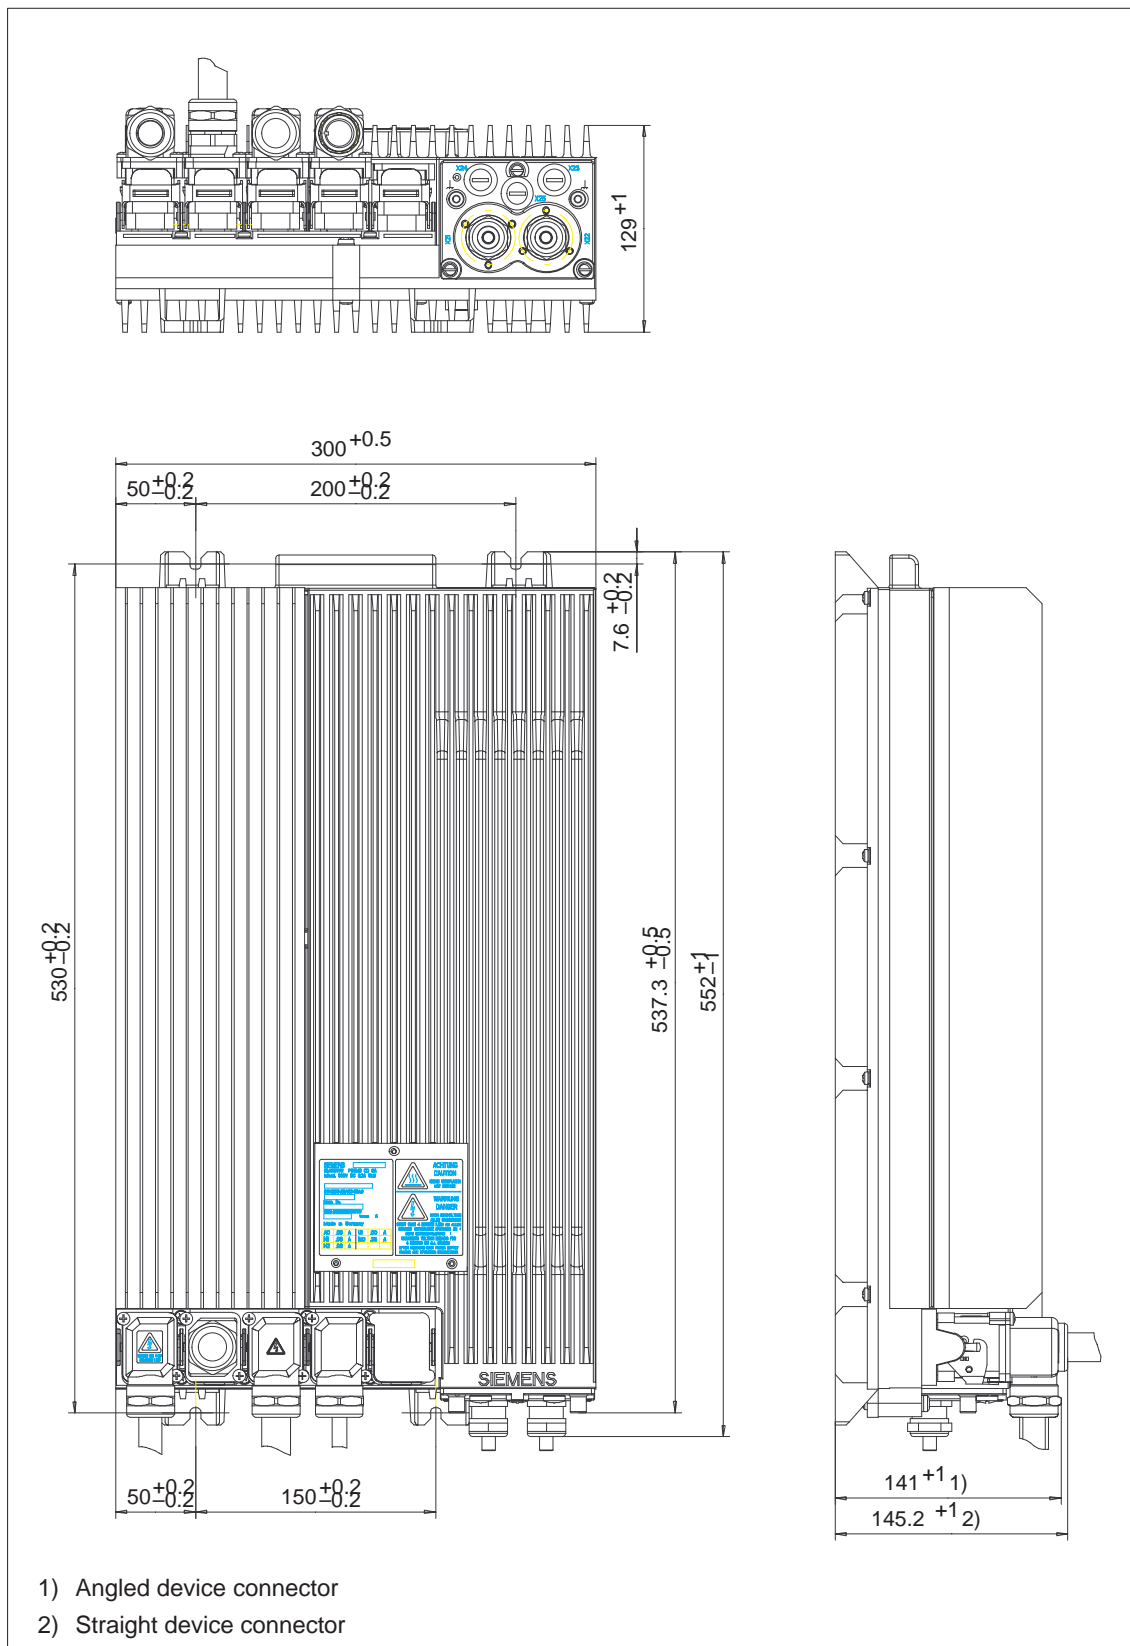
Dimension drawing POSMO CD 18 A, 6SN2 703-2AA0□-0CA1
